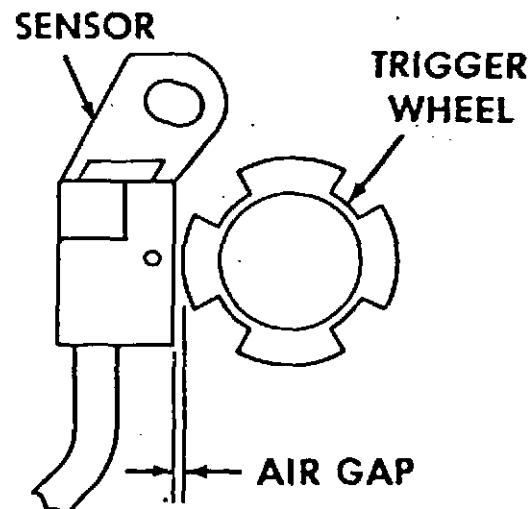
TRIGGER WHEEL TO SENSOR AIR GAP
